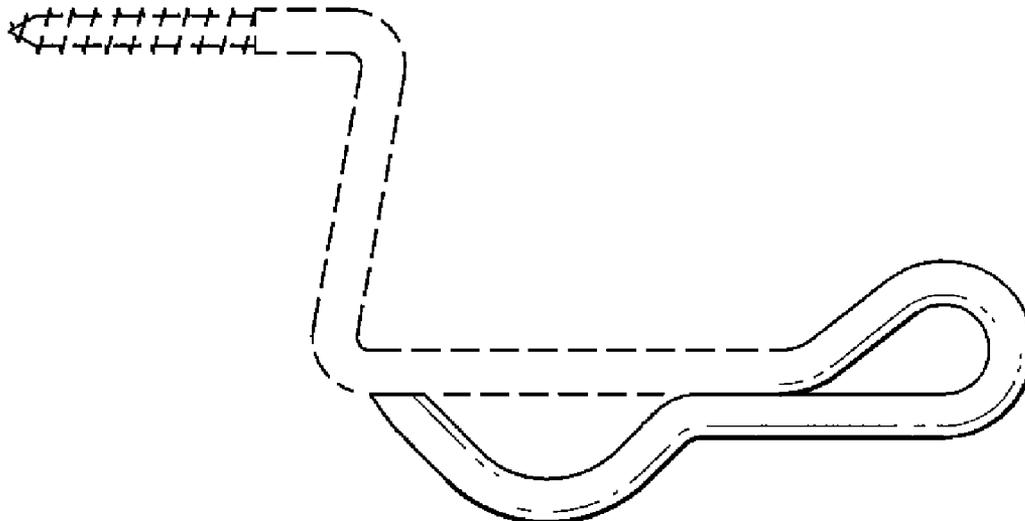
is a bottom side view of the climbing step illustrated in FIG. 1.
